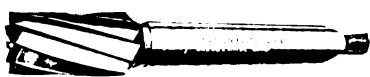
Spiral Cut End Mill Shown with B. &amp; S. Taper Shank
